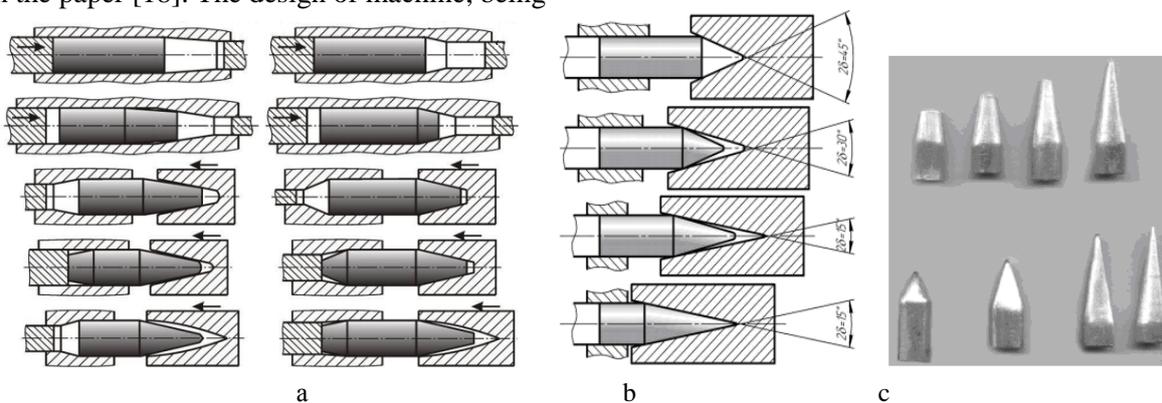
The multistage technology of rods upsetting [17] with sharpened end (a and b) and forgings (c)
